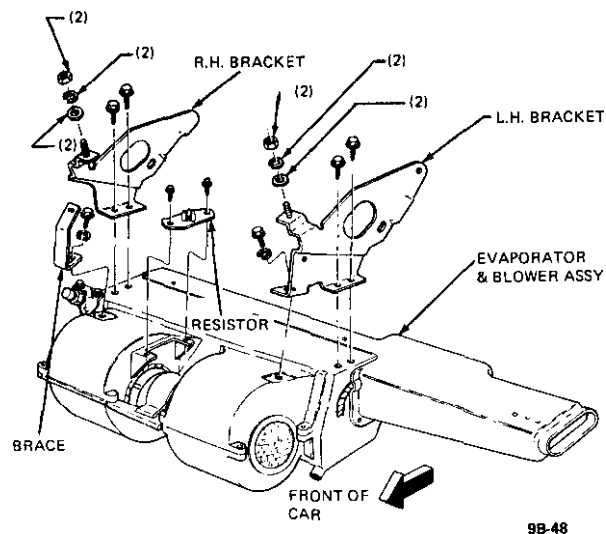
B-182 Evaporator and Blower Assembly Brackets and Attachments
